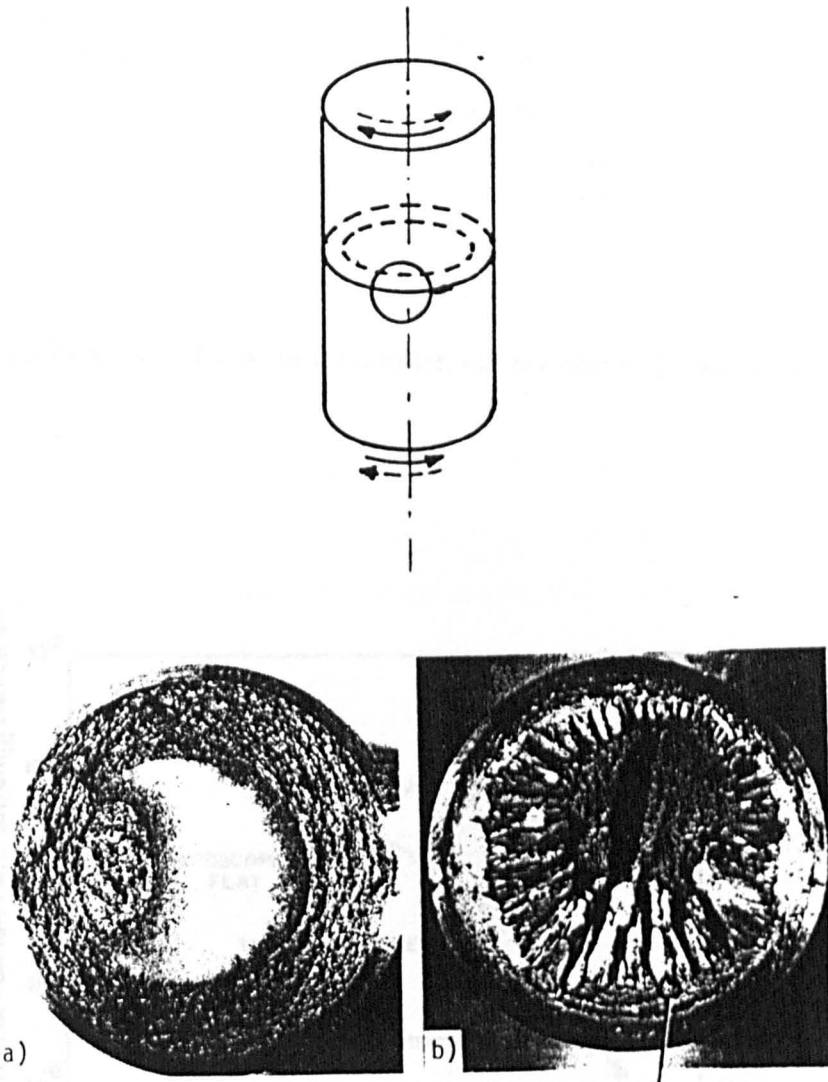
Schematic illustration showing the plane of fatigue cracks in torsion with two types of failures (a) macroscopically-flat mode (pure radial mode III) (b) factory roof fracture (radial mode III with 45° mode I branch crack).
